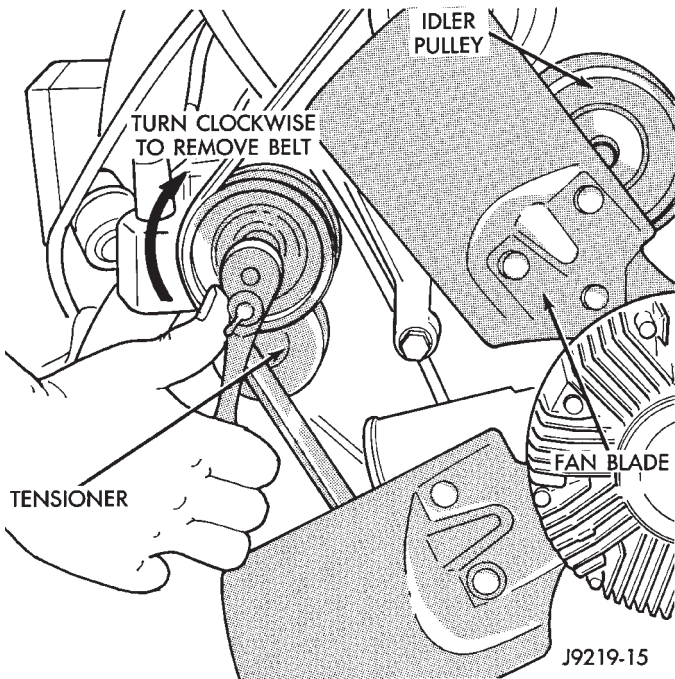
Belt Tensioner—5.2/5.9L Engines
